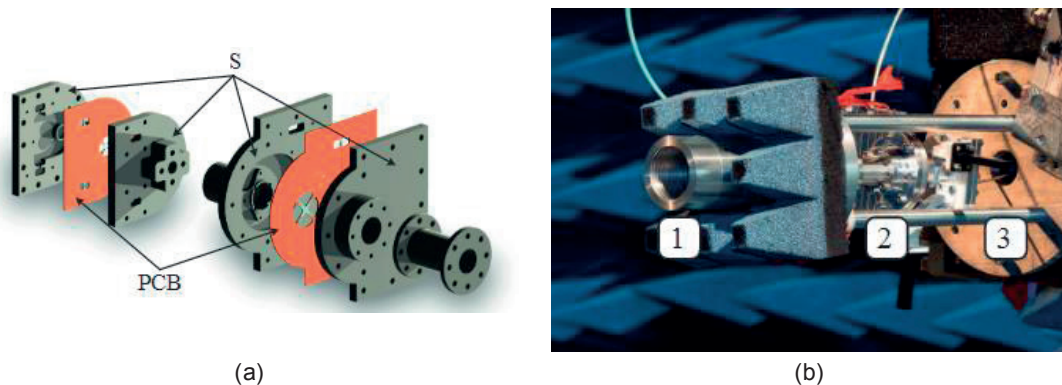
Hybrid feed chain [65]: (a) design; (b) prototype.
